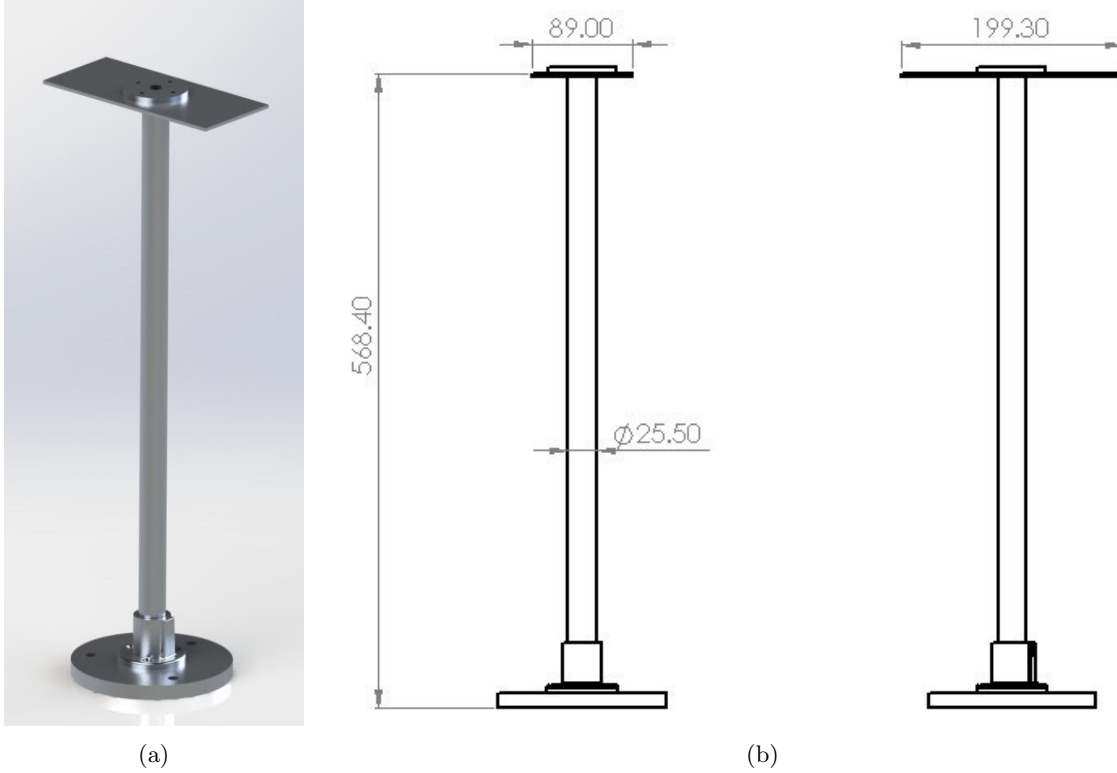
(a) 3D render of the tower assembly; (b) 2D render of the tower assembly
